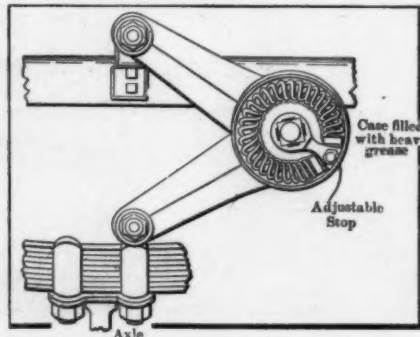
View of the Penfield Shock Absorber with the dust cap removed
